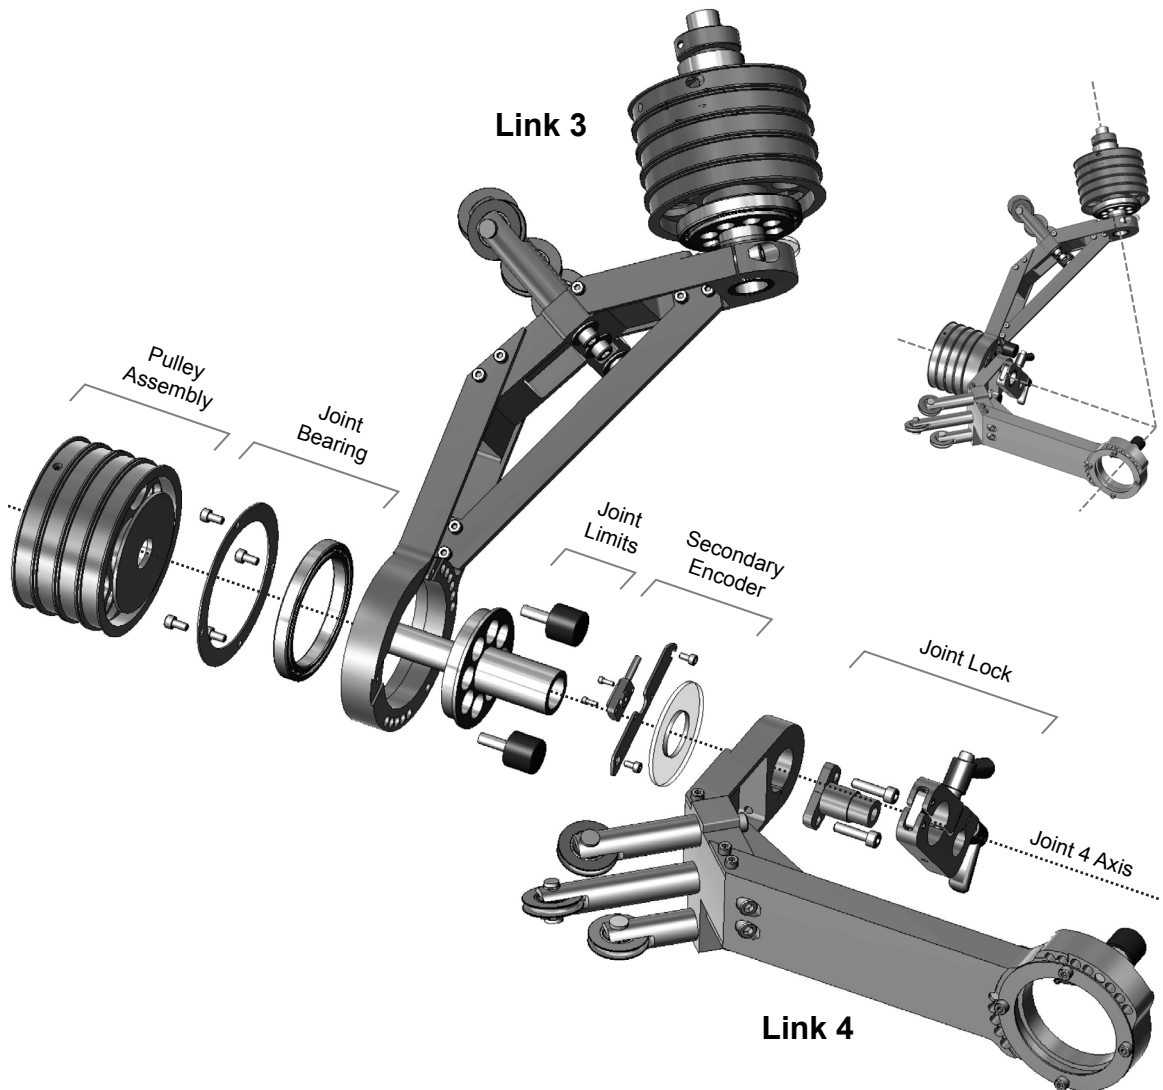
An exploded view of MEDARM's joint 4. The small inset at the top right shows the joint in its normal configuration. The joint consists of several components including the pulley assembly, the bearing, joint limits, a secondary encoder, and a lock.
